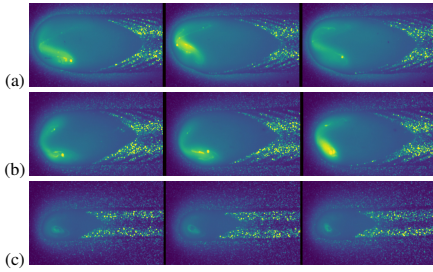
Raw images of the weld pool for different welding speeds. (a) 2.3mm/s welding speed (multimedia view)- (b) 3.3mm/s (multimedia view)- (c) 4.3mm/s (multimedia view)
